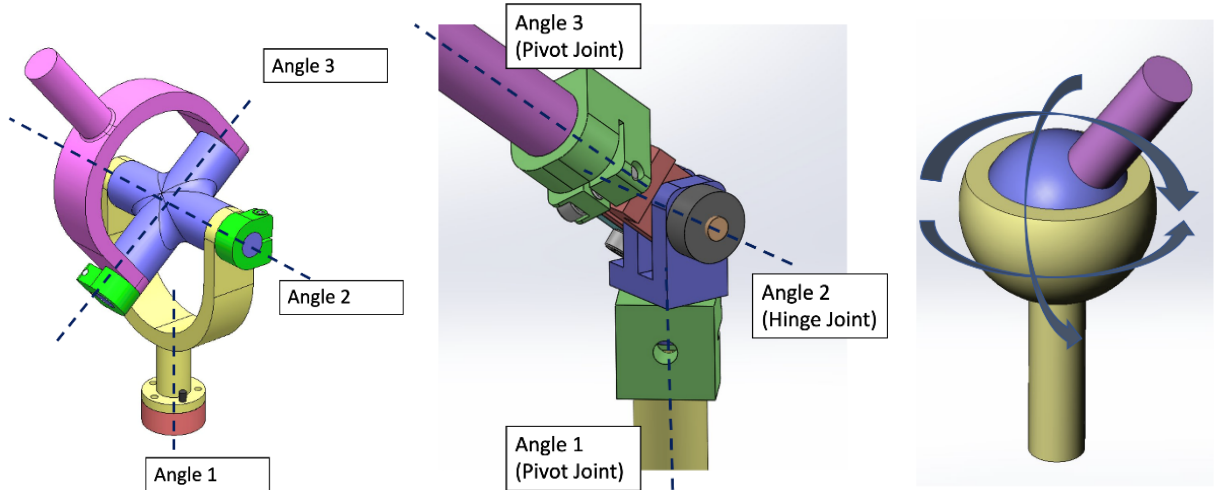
Universal joint with rotator (left), pivot-hinge-pivot (middle), ball-and-socket design (right)
